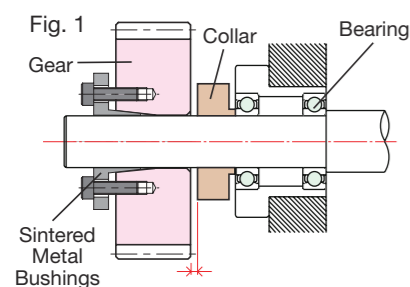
Clearance (Assembly conditions require clearance of 1 mm or more)
